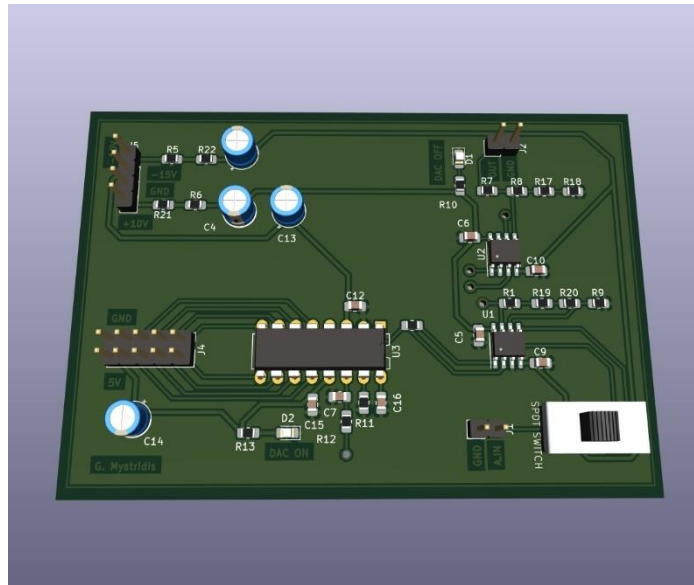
Back side of the PCB on KiCad 3D Viewer.
